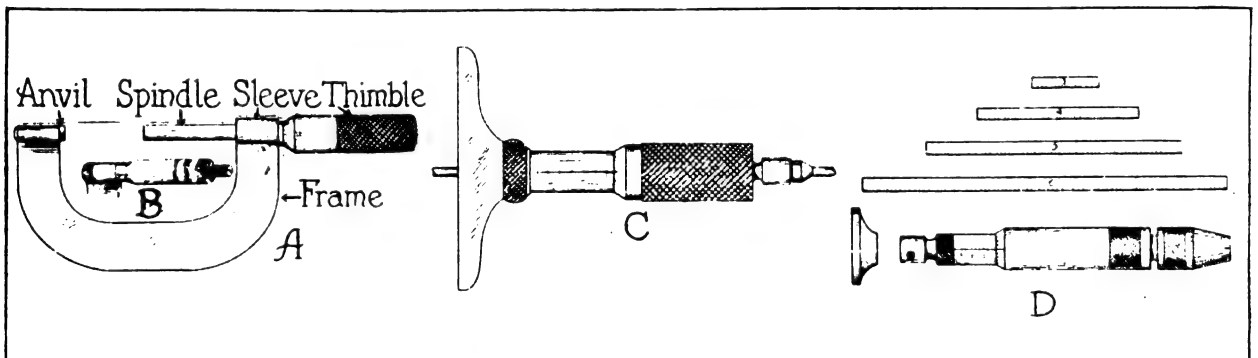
A, Micrometer Caliper; B, Spindle and Sleeve of Micrometer Caliper; C, Micrometer Depth Gauge; D, Micrometer Internal Gauge.
